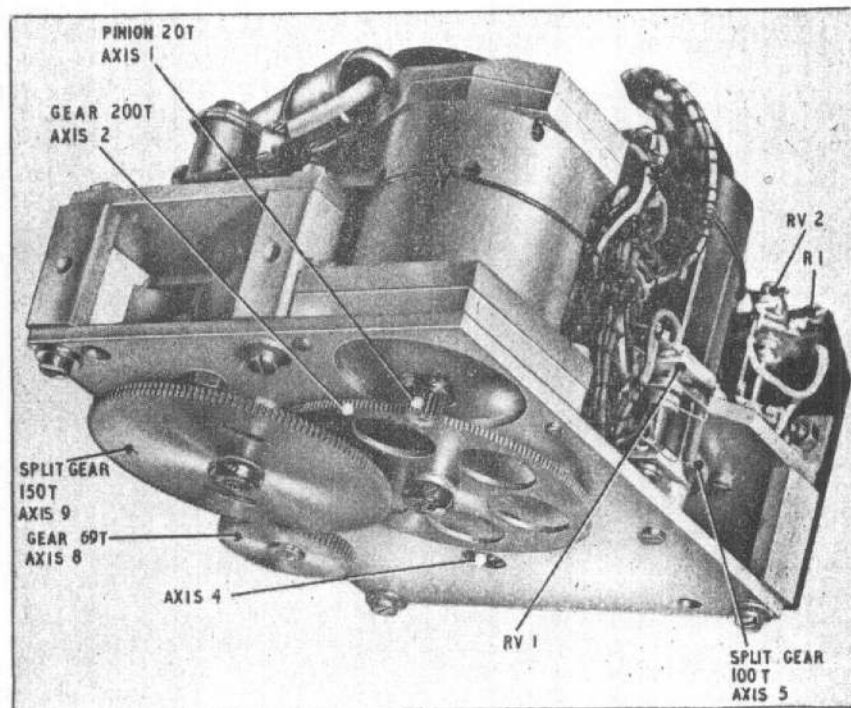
T.A.S. output gearbox assembly (G7)—view B
